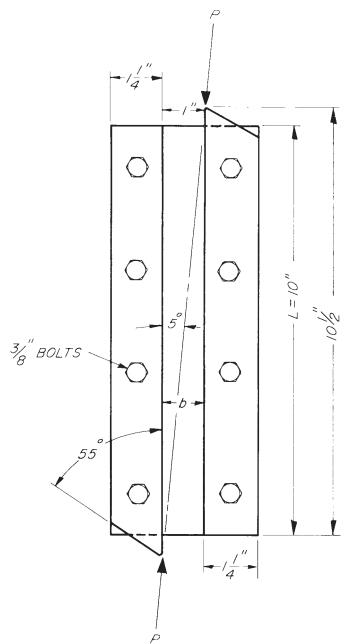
Detail of Loading Rails Used with Edgewise Shear Specimen
